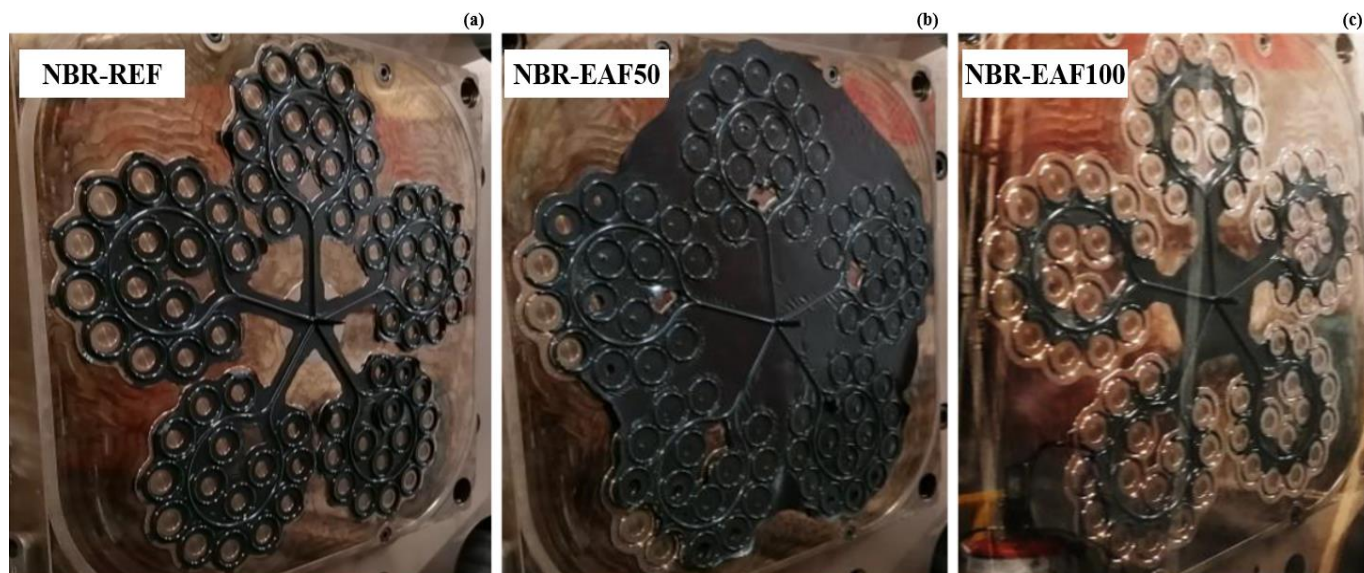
a Molded parts of NBR-REF. b Molded parts of NBR-EAF50. c Molded parts of NBR-EAF100.
